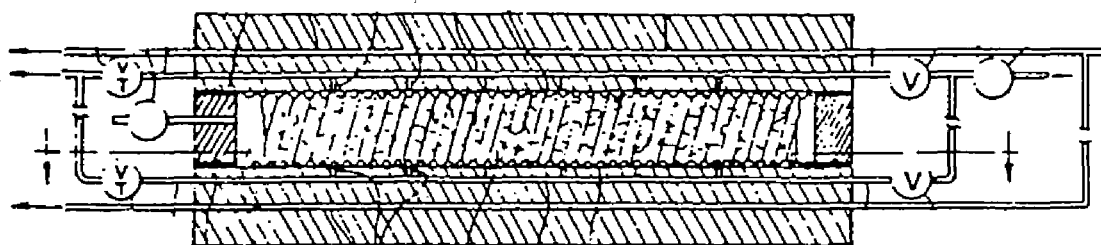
Cross-Section of an Externally Sealed Steam Press.
